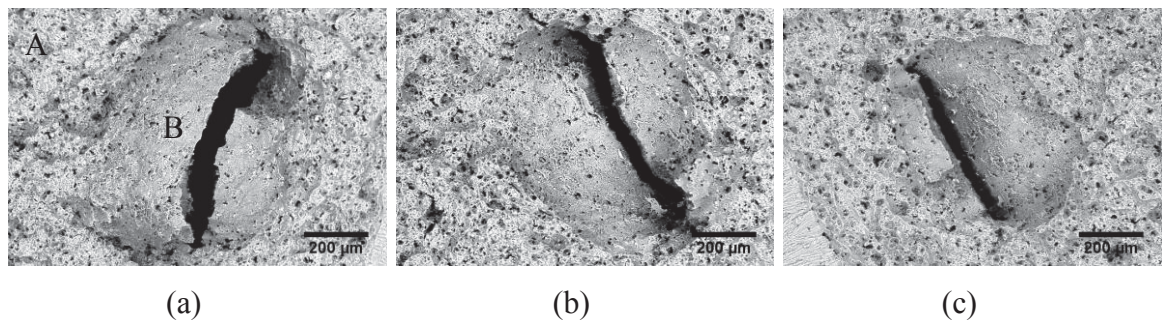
The 7A04-T6 aluminium alloy fracture surface exhibiting a common flaw.
